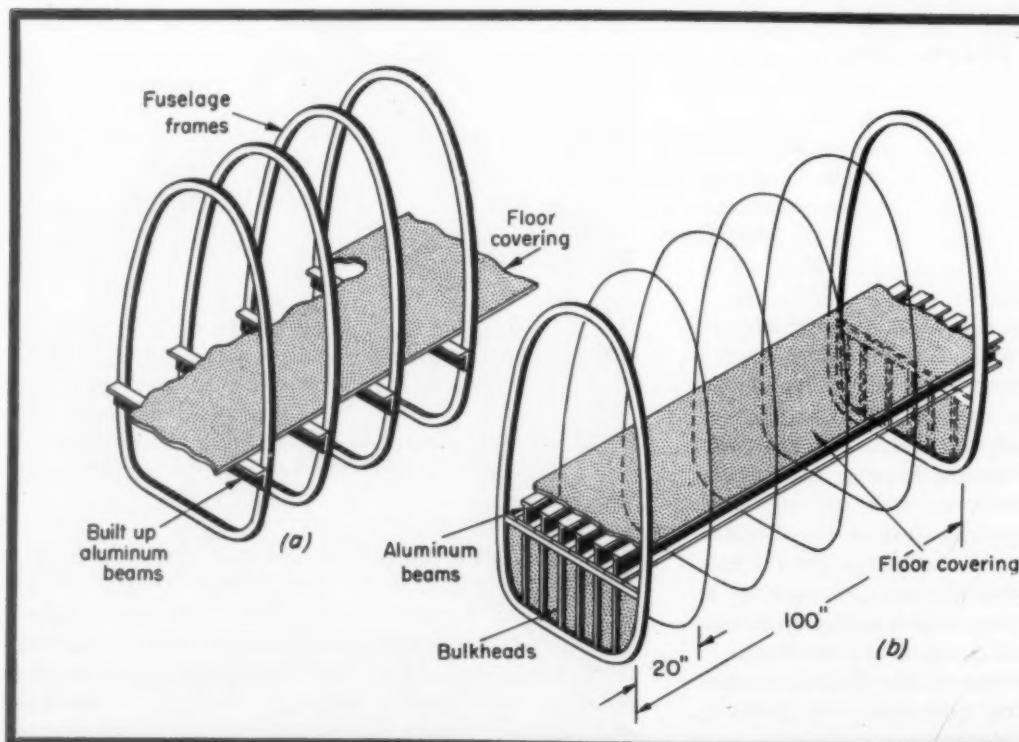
Types of substructure considered for the cargo floor construction. Transverse beams connect to individual frames while longitudinal beams are supported by bulkheads.
